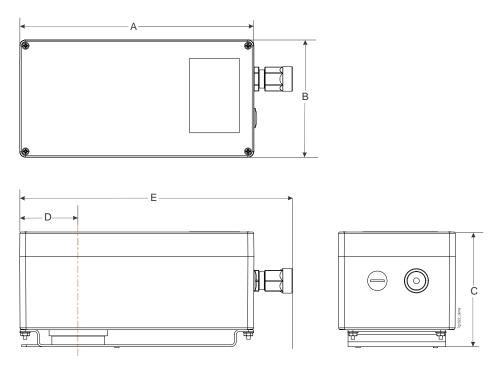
M9000-322 Damper Weather Shield Kit Dimensions, in. (mm)
